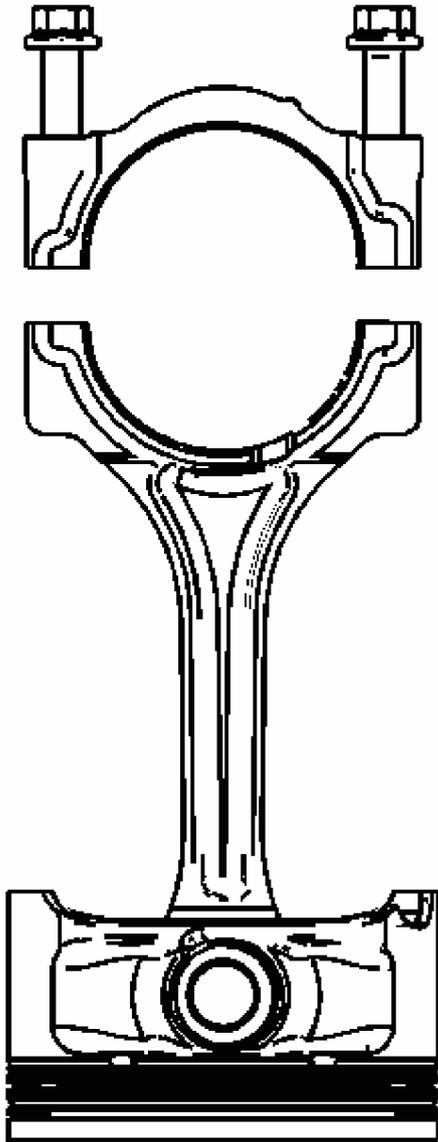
View Of Connecting Rod Cap, Connecting Rod & Piston Assembly
